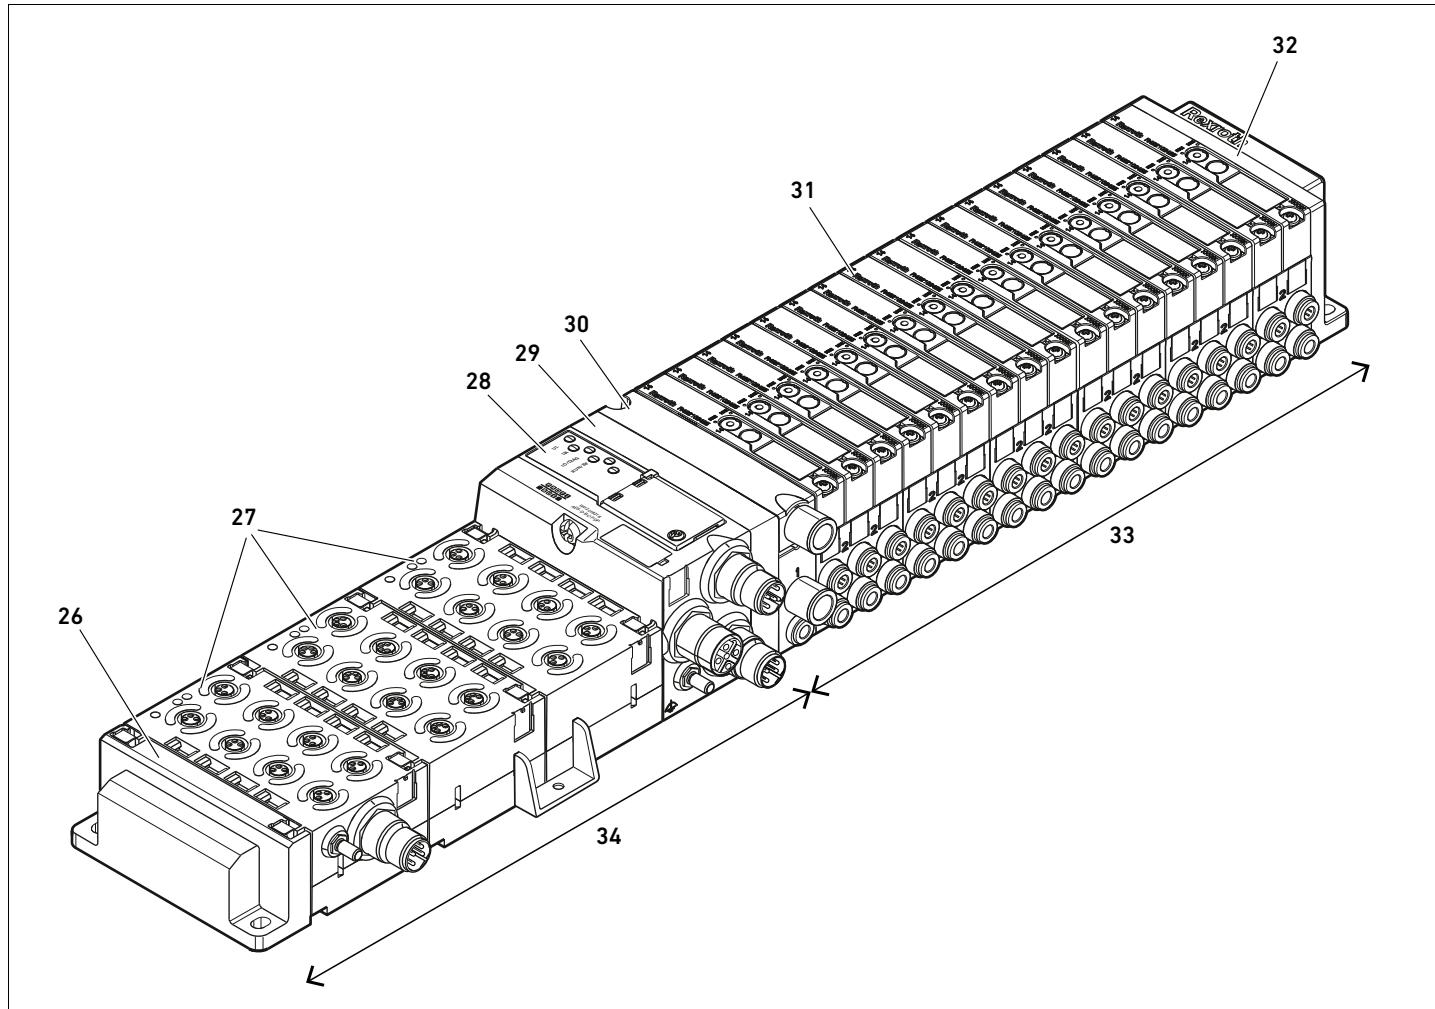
Example configuration: unit consisting of AES series bus coupler and I/O modules, and AV series valves
